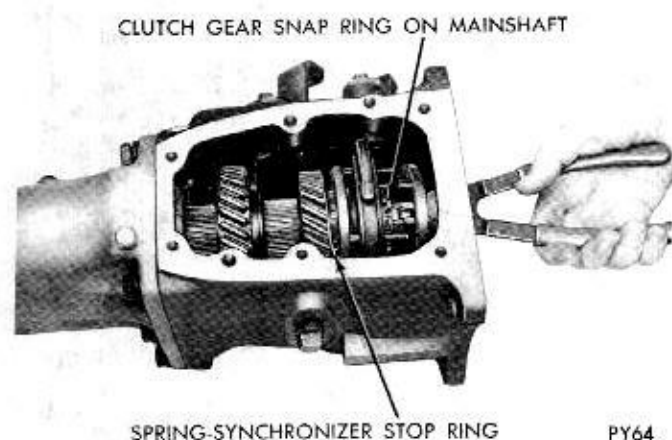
Removing or Installing Clutch Gear Snap Ring
